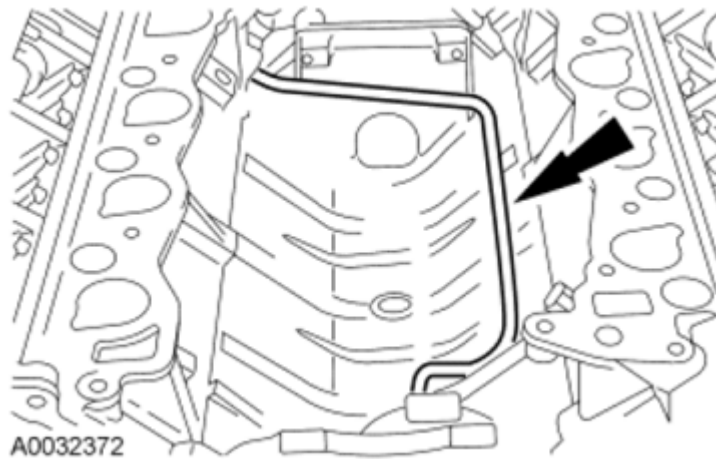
Locating Knock Sensor (KS) And Nut
